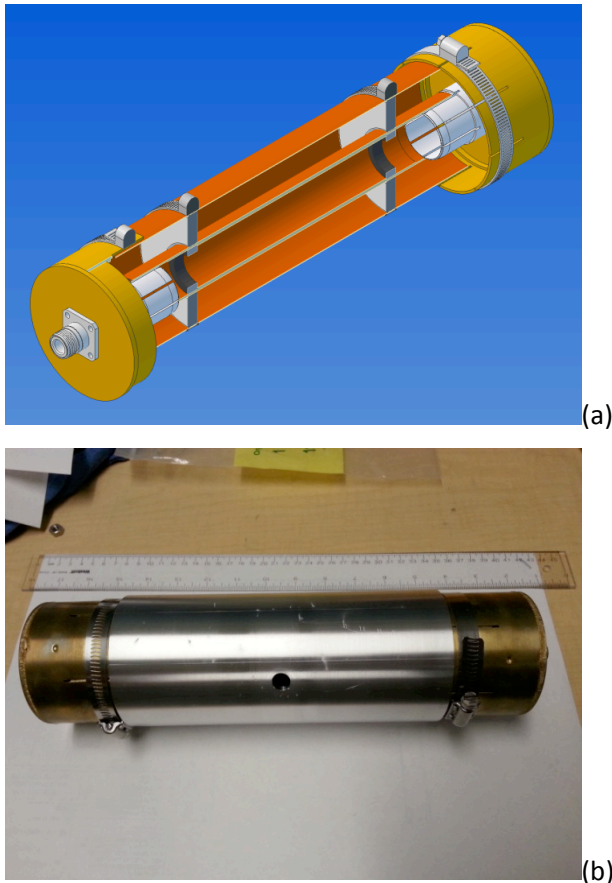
Low Power RF test set-up for testing window / inner conductor braze assembly (a – 3D drawing, b – as fabricated).
